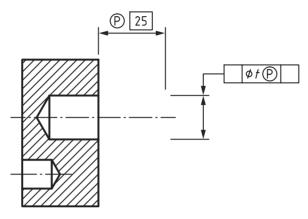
Indication of a geometrical specification with projected tolerance modifier using direct indication of the length of the extension by a TED
